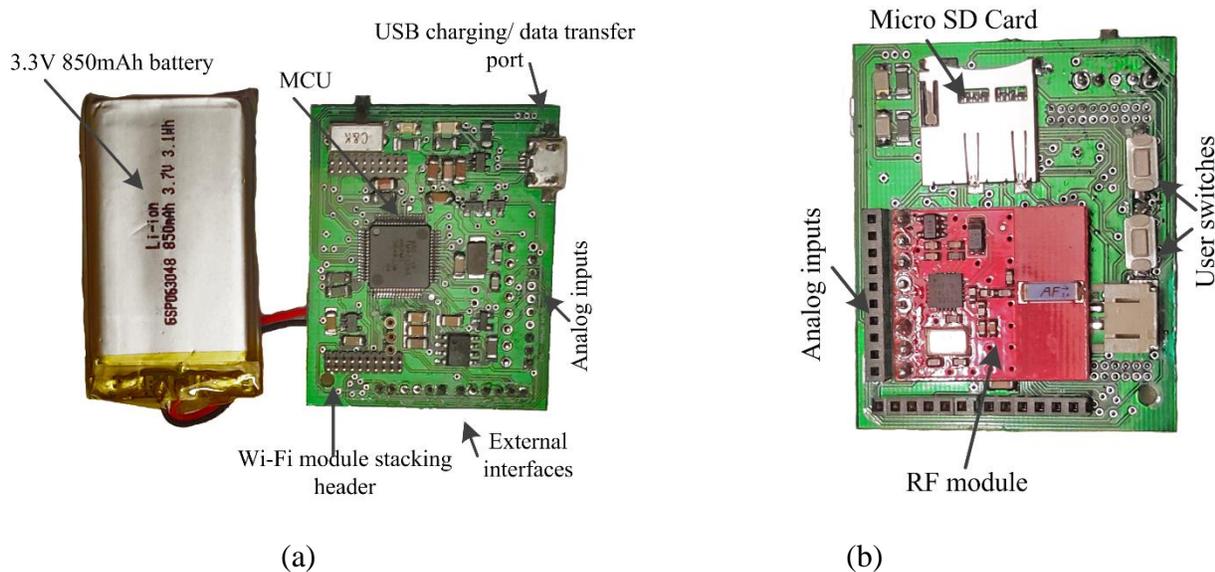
Wi-Fi data logger PCB after assembly:(a) top view with battery and (b) bottom view with RF transceiver.
